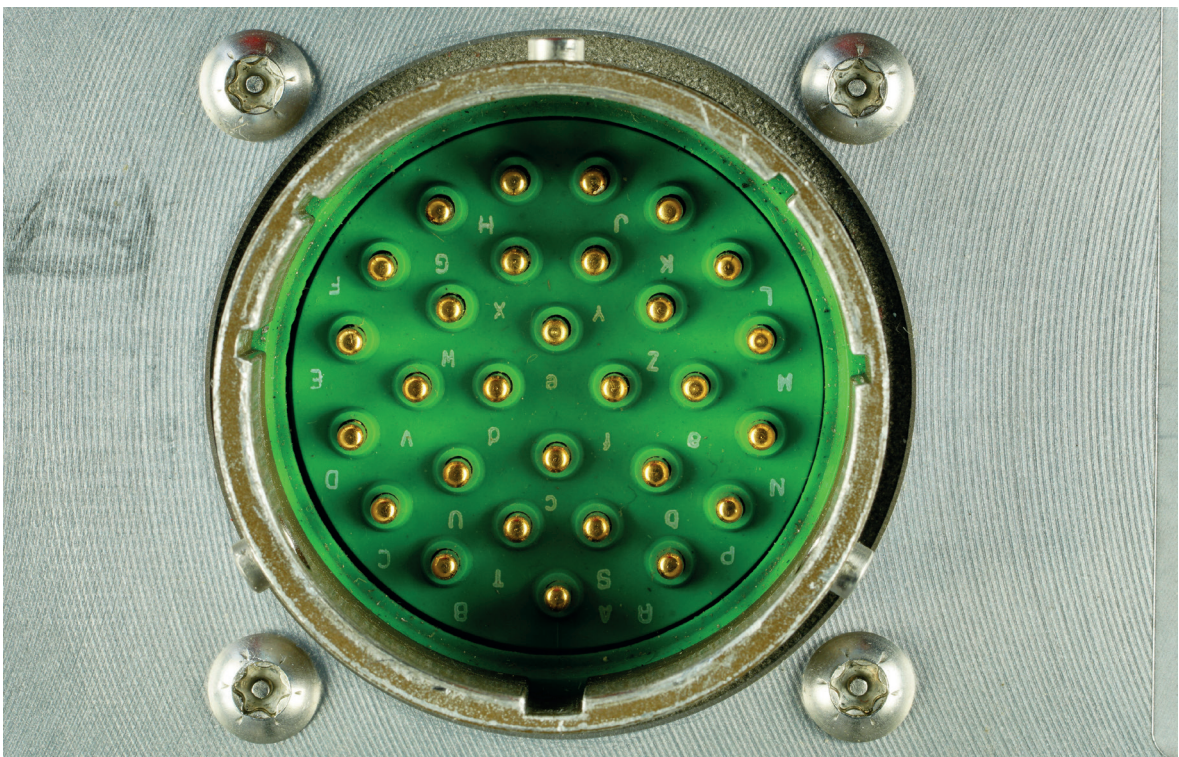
FADEC B socket pins. (Source: Technify Motors)
